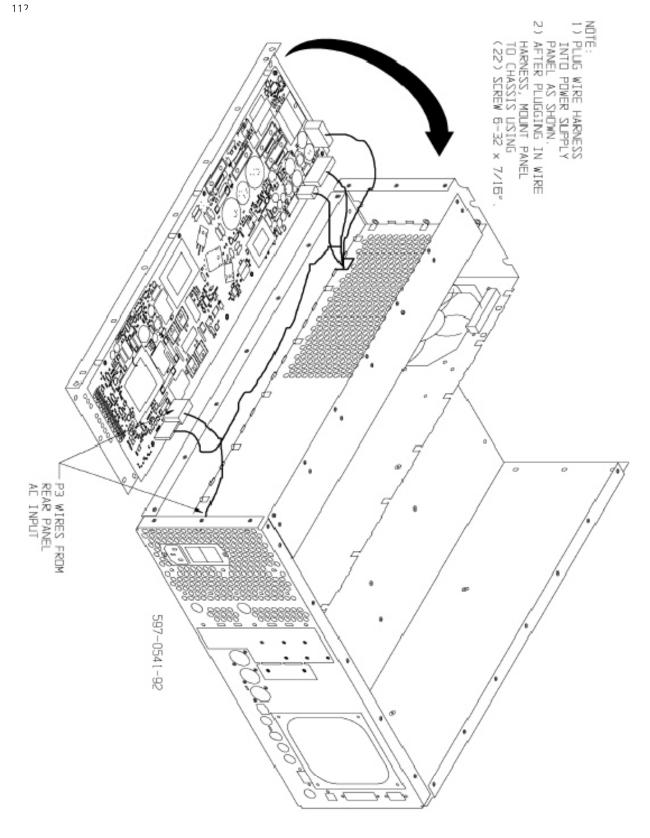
FXi POWER SUPPLY REMOVAL AND INSTALLATION (Sheet 2 of 2)
